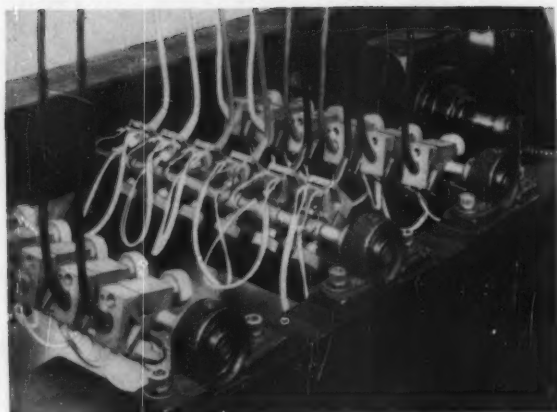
Close-up of the bending machine showing cord holders that are employed.
